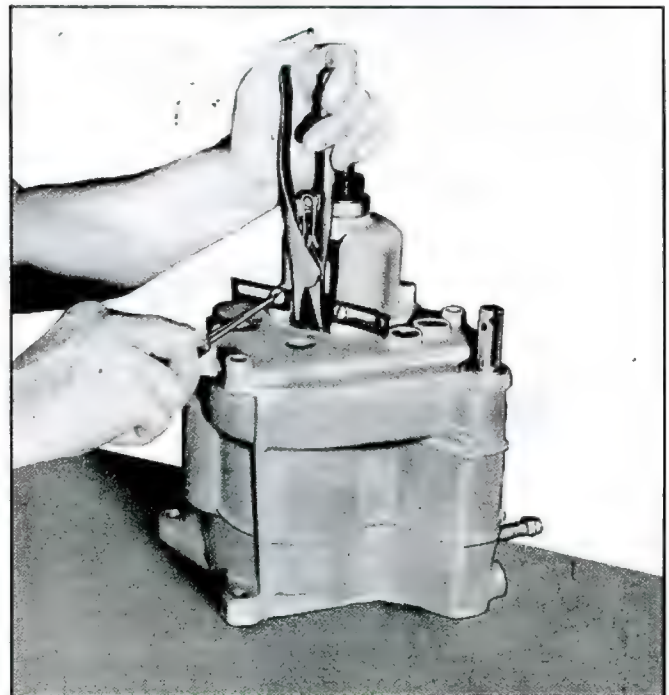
A-6—Locking Clutch Gear Retainer Expanded with J-8361
